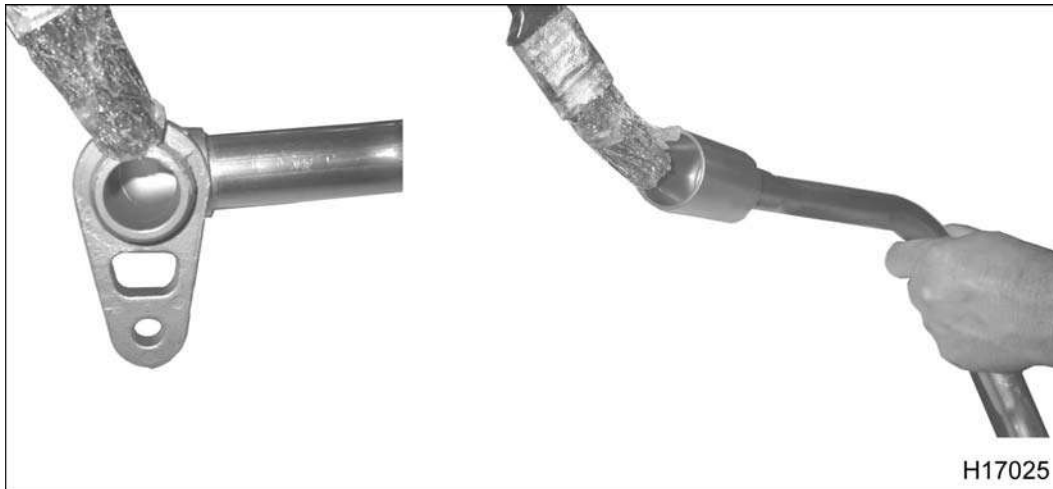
Brushing lubricant and sealant onto pilot end (left) and adapter end of EGR coolant return tube (right)
